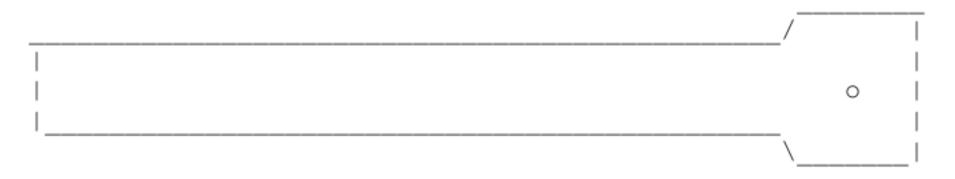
pipe with one end flattened and fuse hole drilled (top view)
